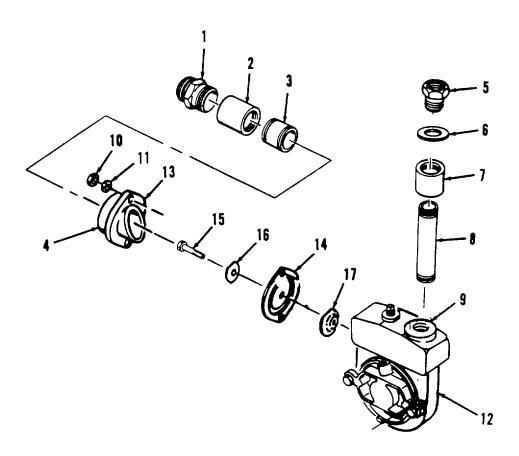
Pump Inlet/Outlet Piping Repair and Suction Flange Assembly Repair and Replacement.
